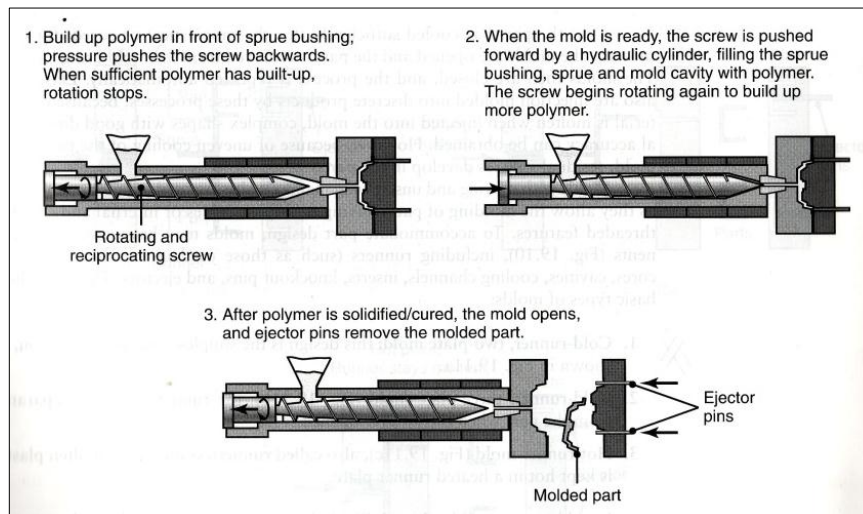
Sequence of operations in the injection molding of a part with a reciprocating screw. This process is used widely for numerous consumer and commercial products, such as toys, containers, knobs, and electrical equipment [13].
